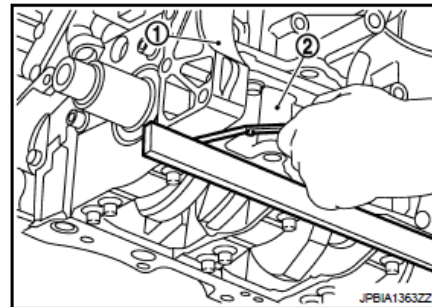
Checking Surface Height Difference Between Oil Pan (Upper) Mounting Surface
